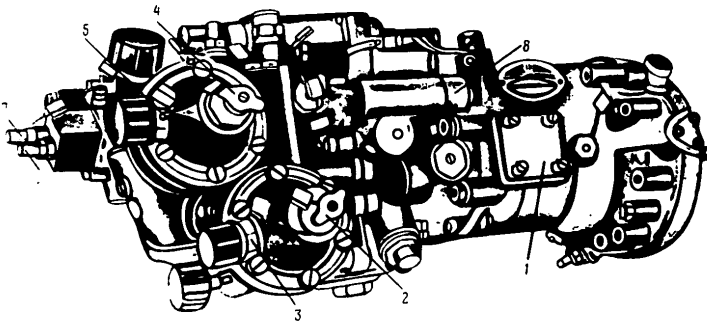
HP-10AKC Unit, View on Fuel Supply Connection
